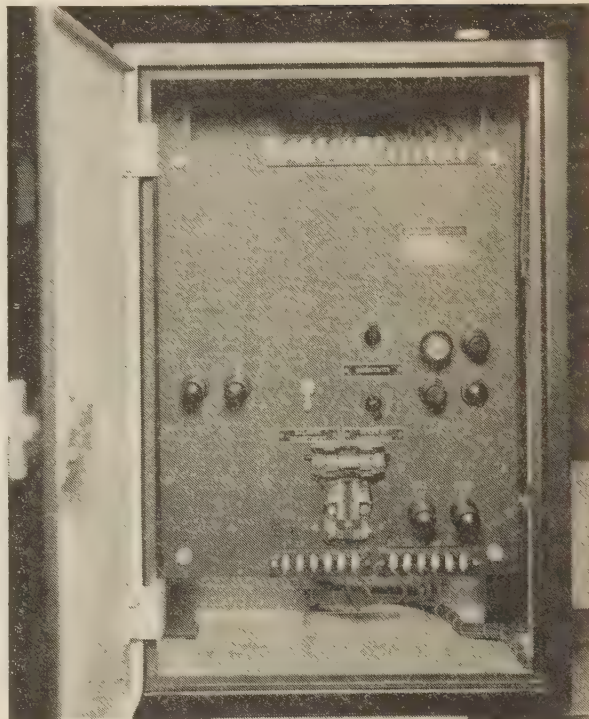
(b) ELECTRONIC PANEL FOR CONTROL OF CORRECTING MOTOR ON MACHINE SHOWN IN FIG. 24 (a)
